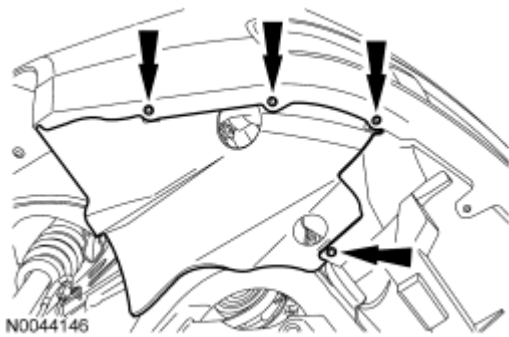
Locating Screws And Position LH And RH Splash Shields Aside
